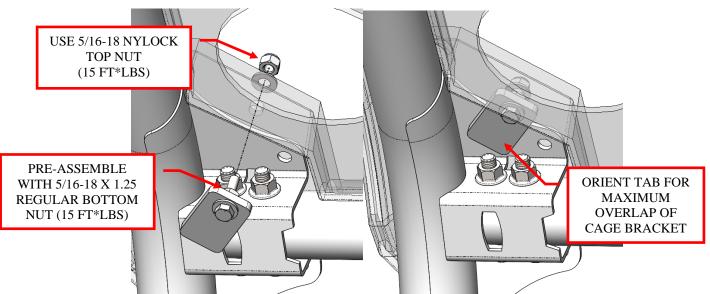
Bolt the roof to the front of the cage (left side shown, right side similar).
